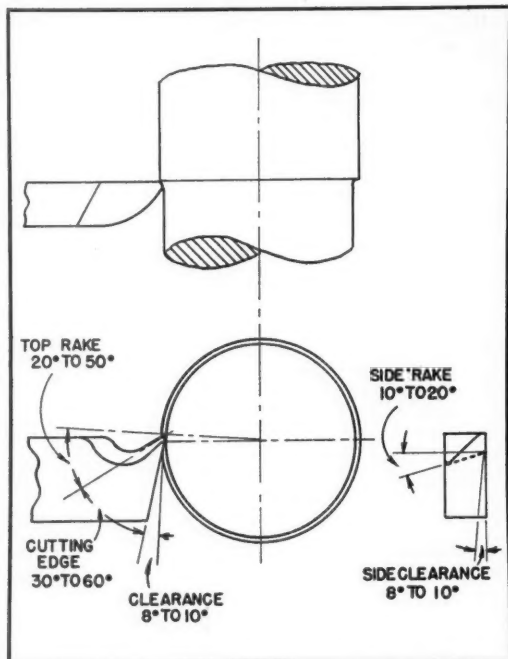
Drawing Showing Recommended Rake Angles for Aluminum Cutting Lathe Tools
